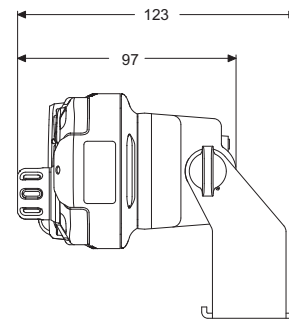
Side View of O2 Control Head with Remote Mount and Trunnion
